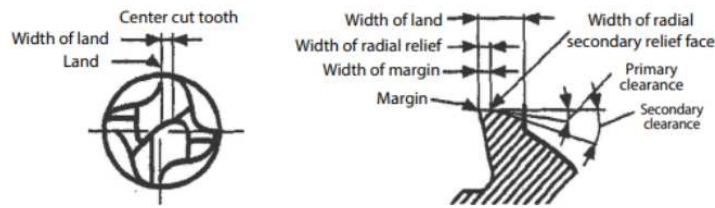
Local cross-sectional representation of an end mill tooth. Adapted from [1].
